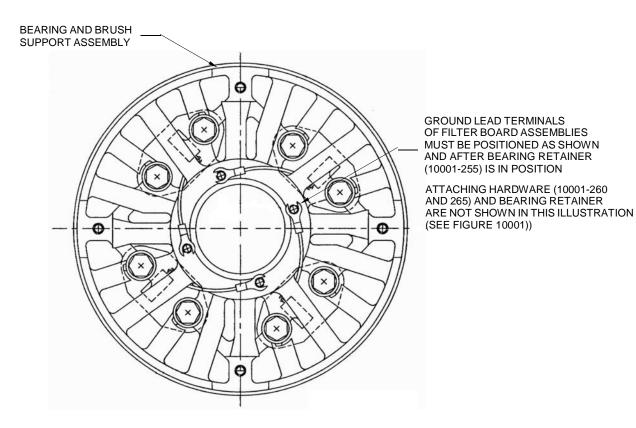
Filter Board Assembly Lead Attachment on Bearing Retainer
